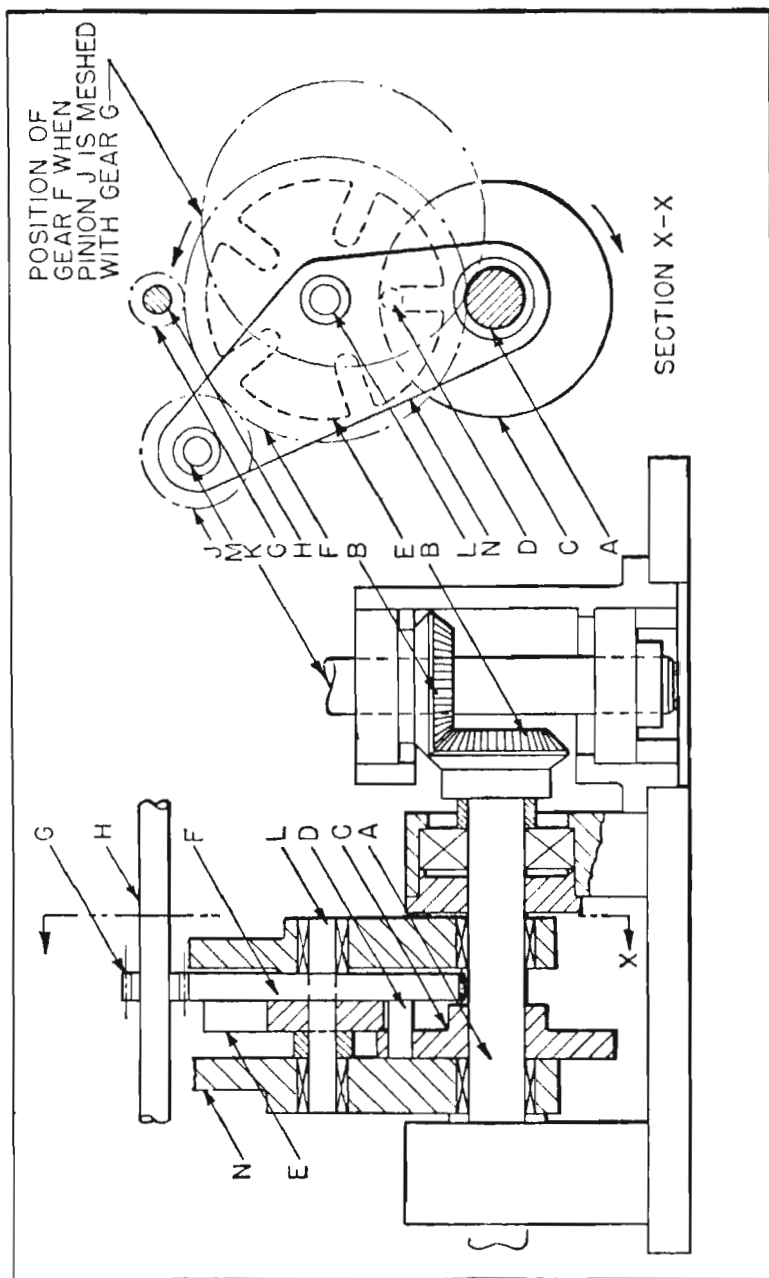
Intermittent and Reversible Rotation of Shaft H is Obtained from Driving Shaft A by Means of Geneva Wheel E and Gearing.
